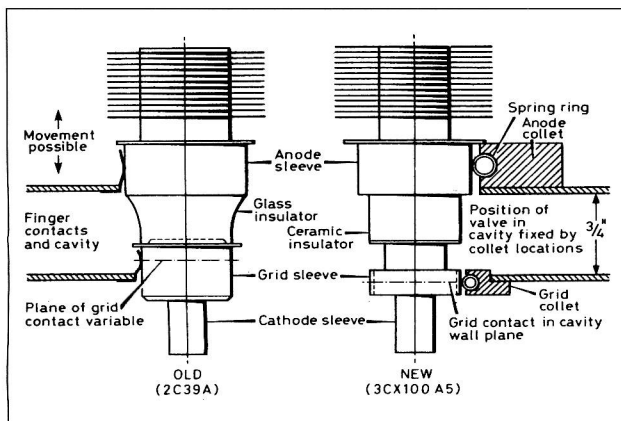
Old and new methods of mounting valves in a cavity (omitting details of anode DC supply)
